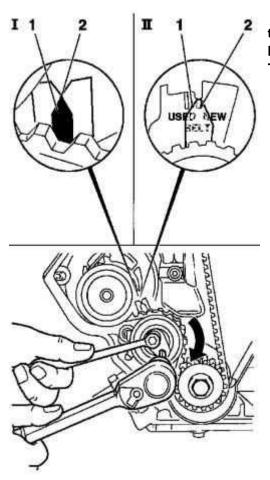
Adjusting the tension of toothed belt tension pulley on a pointer: 1 - pointer tension pulley, 2 - Tag
